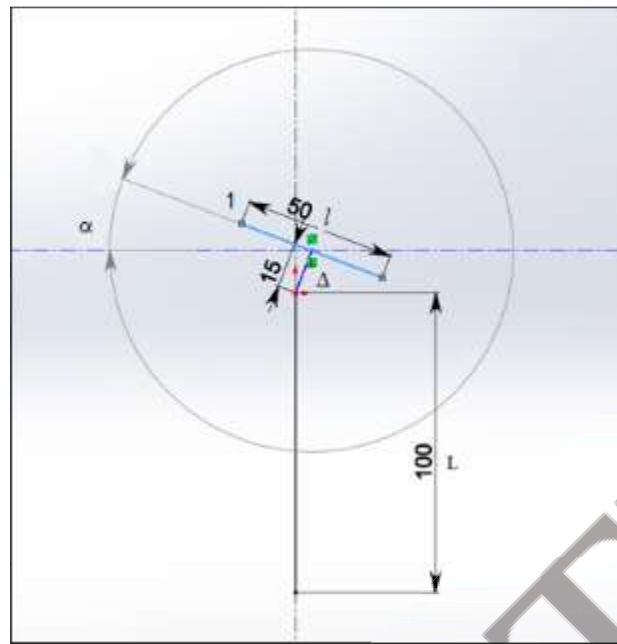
Impact of the wheelbase and the arm length on the steering angle
